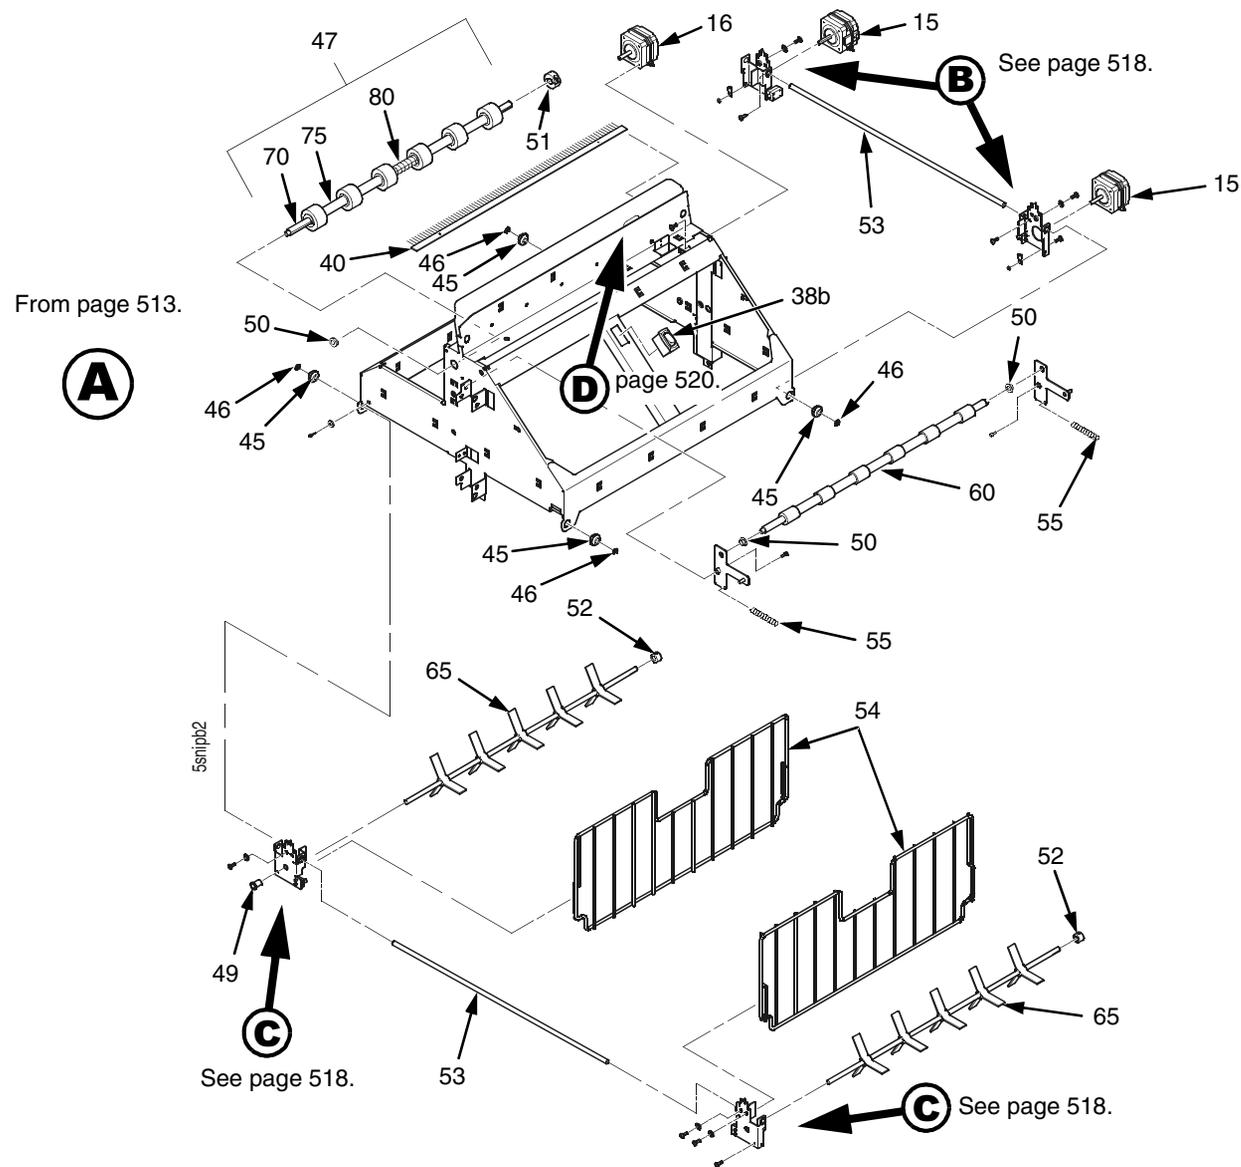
This illustrated parts breakdown is an exploded view of the stacker elevator, showing the motors, rollers, and paddles.
